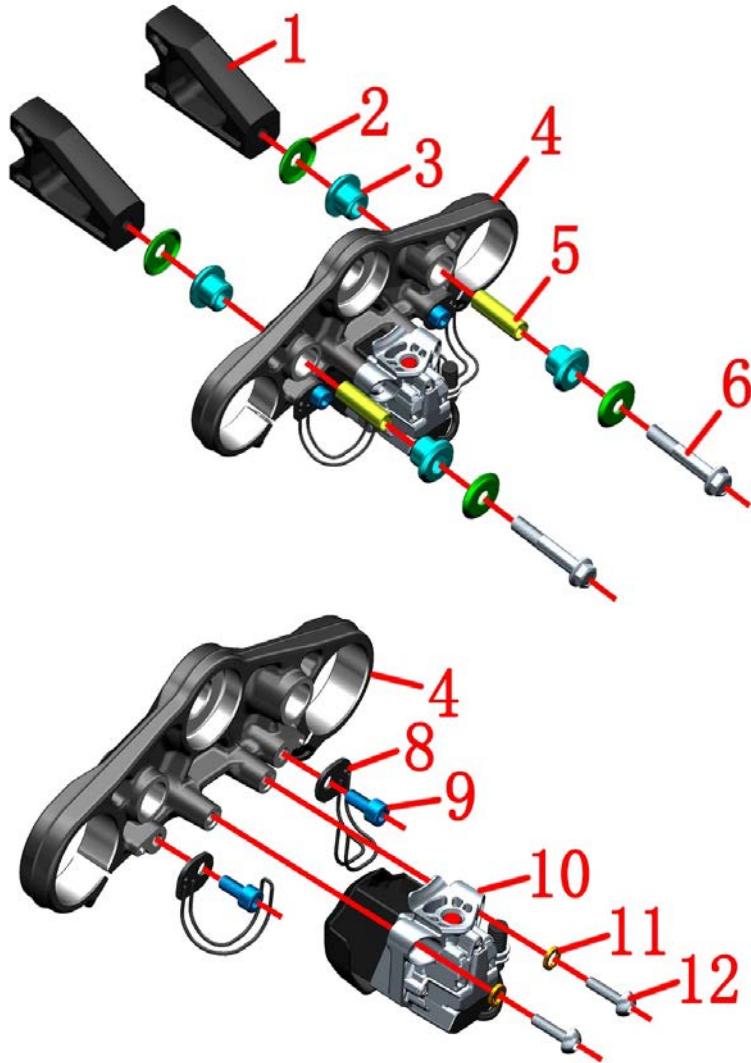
Front Fork Assembly		Upper Triple Clamp, Handlebar Damper Assembly	CHK	CAUTION
